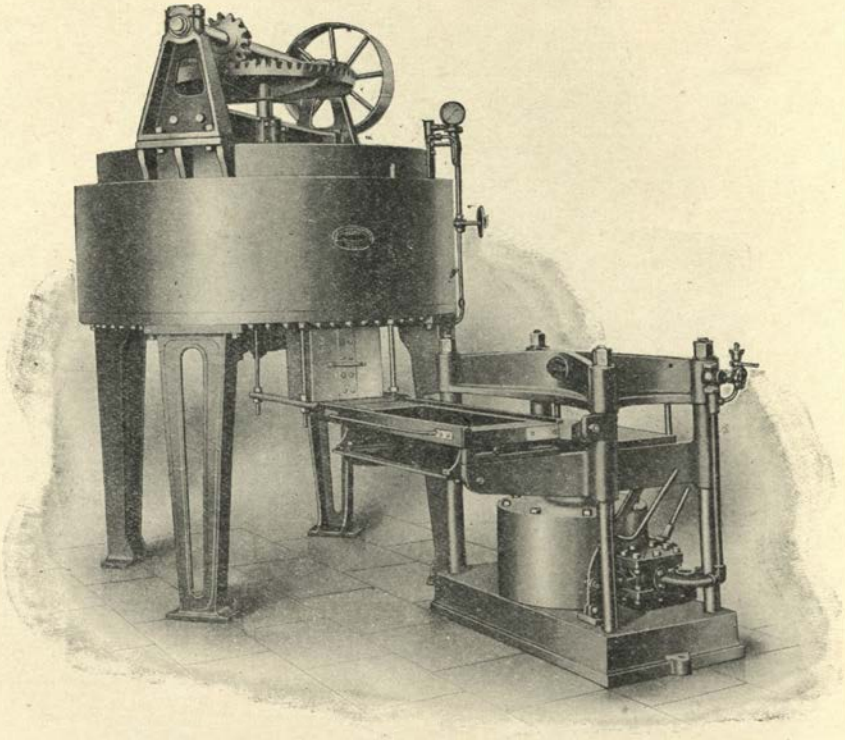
Belt-Driven Anglo-American Kettle and Steam Moulding Machine.
